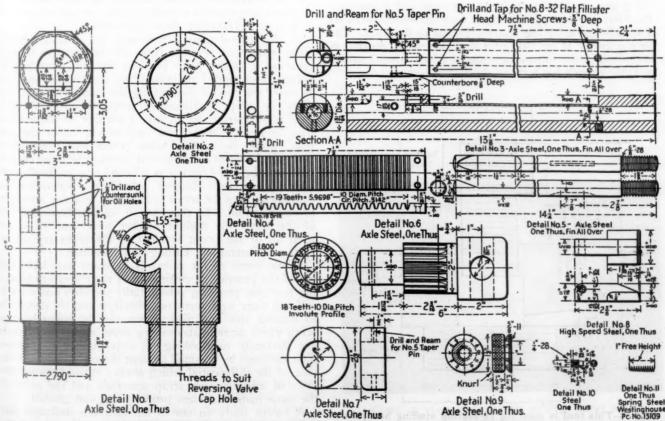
(above) Assembly and details (Fig. 2-below) of a machine for broaching reversing - valve - bushing seats
